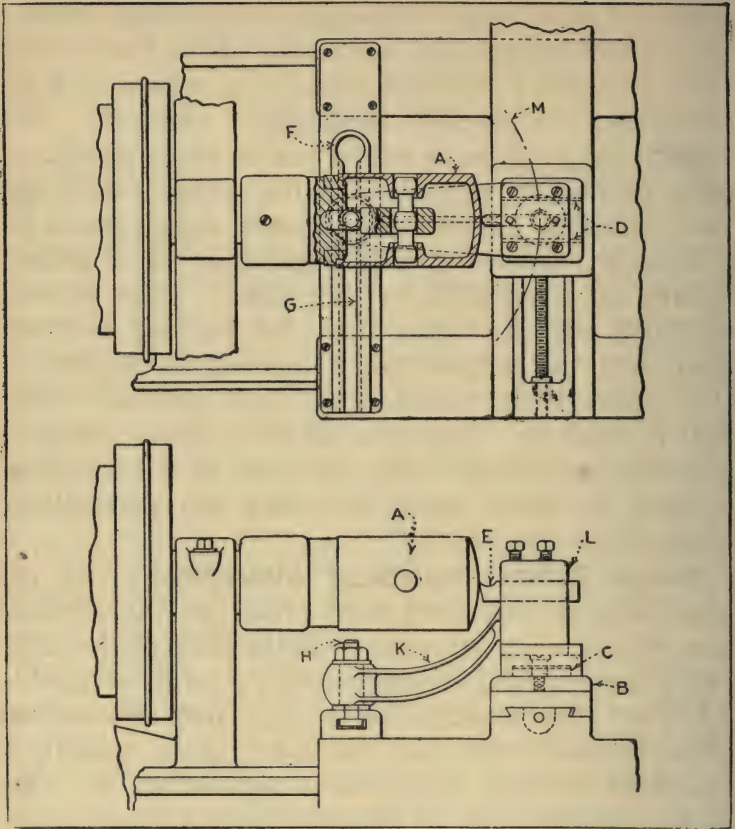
RADIUS GENERATING ATTACHMENT FOR AN ENGINE LATHE
